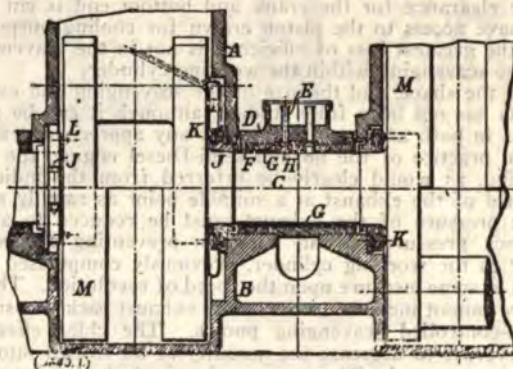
Arrangement of Rings for Securing Air Tightness of Crank Chamber Showing also System of Lubrication of Main and Crank Pin Bearings.
